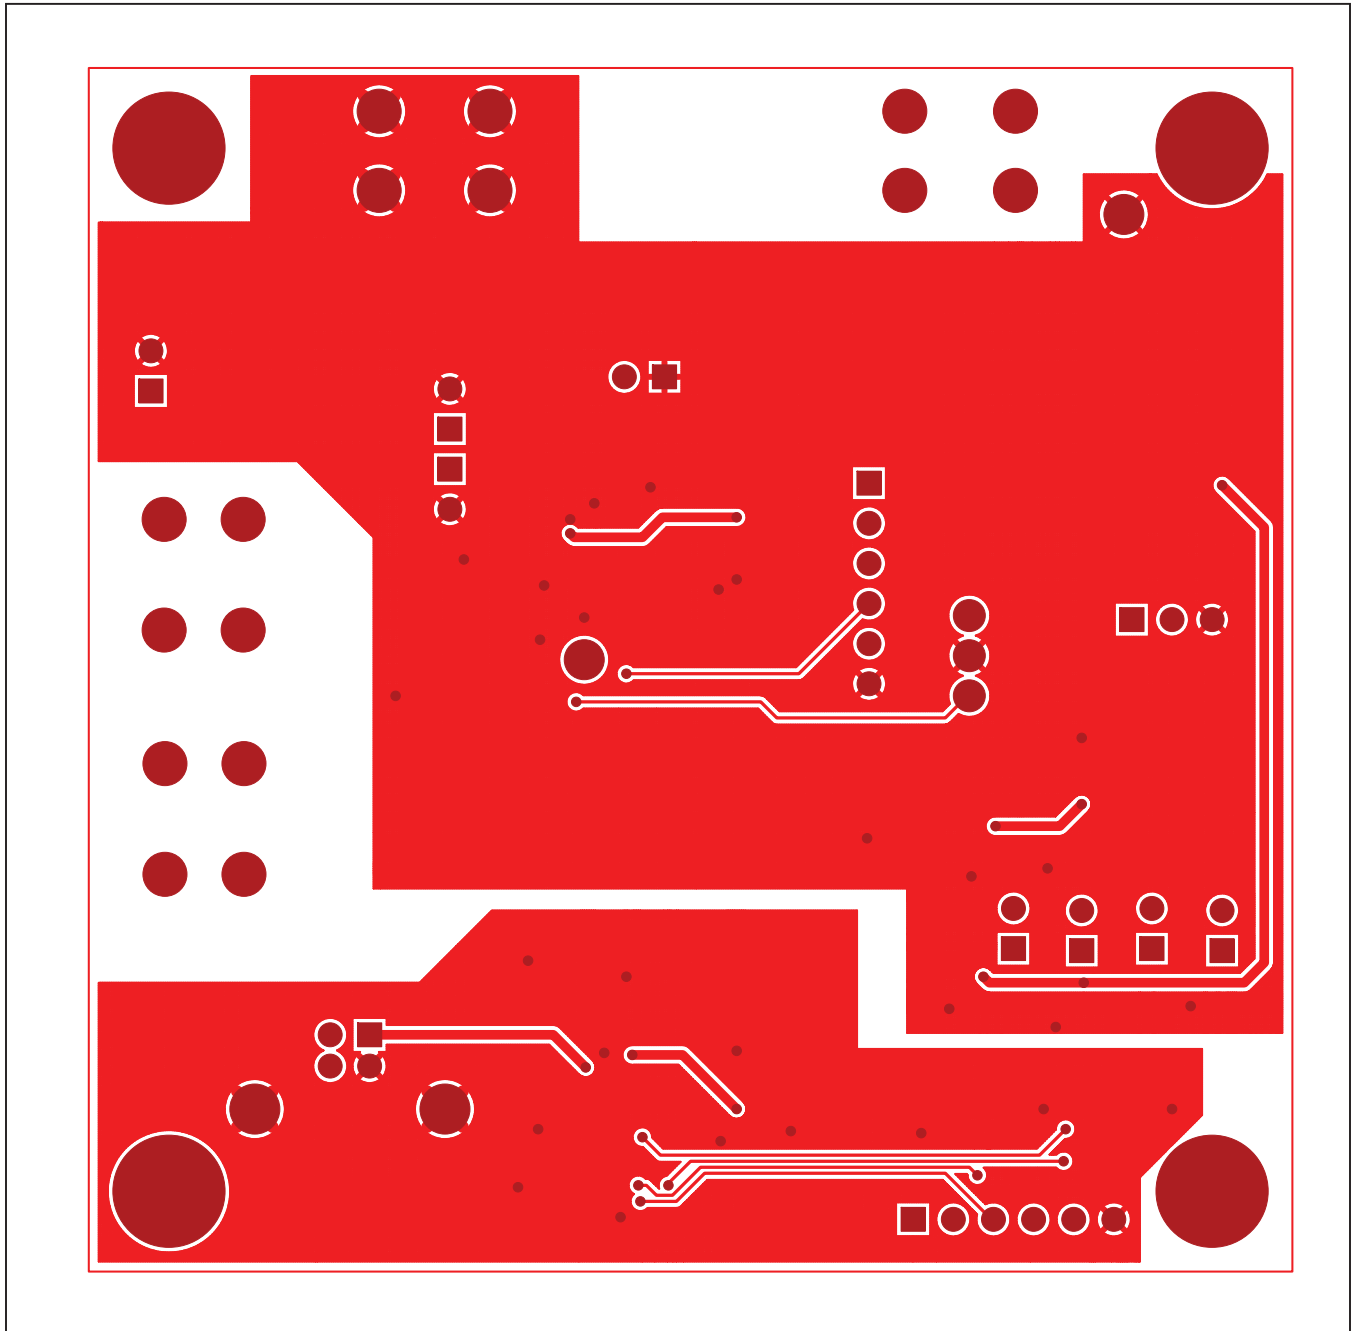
MAX71020A EV Board Layout—Bottom Layer
